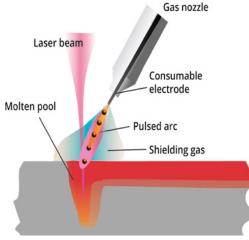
MIG / MAG laser hybrid welding.
